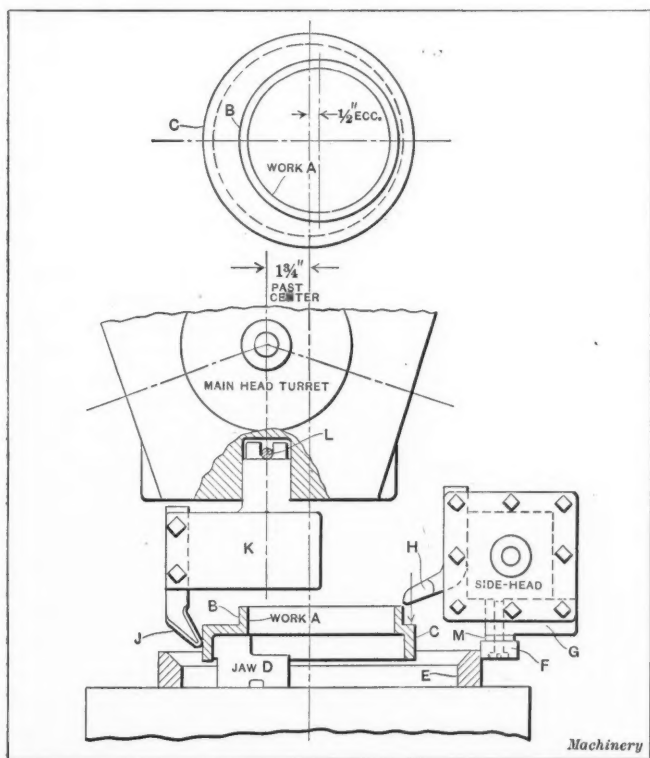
Eccentric Turning by means of Eccentric Guide Ring
